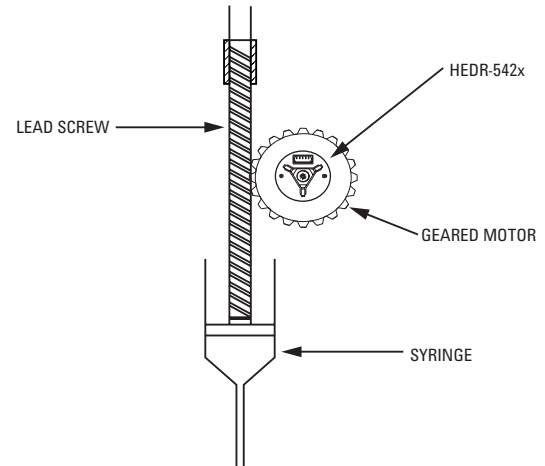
Encoder Used in a Volumetric Dispenser Machine.
